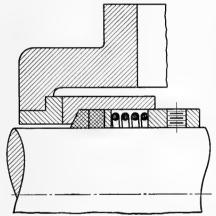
Cooke-type seal that embodies the patented principle of maintaining contact between the stationary and moving surfaces.
